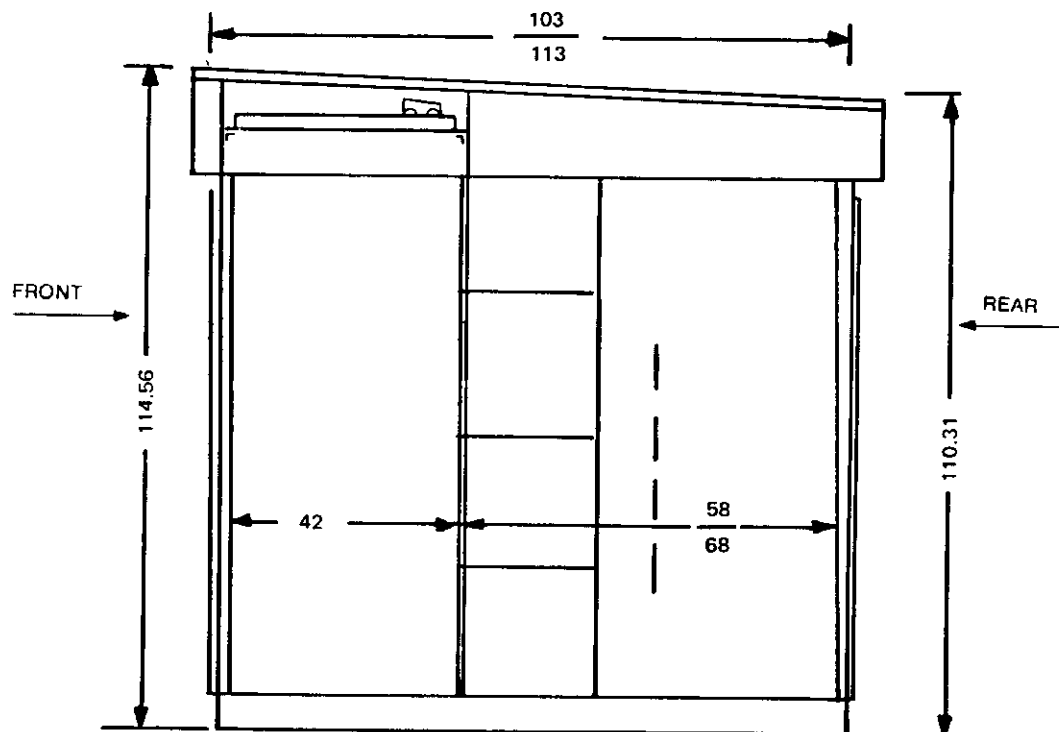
OUTDOOR WALK-IN ARRANGEMENT SIDE SECTION
